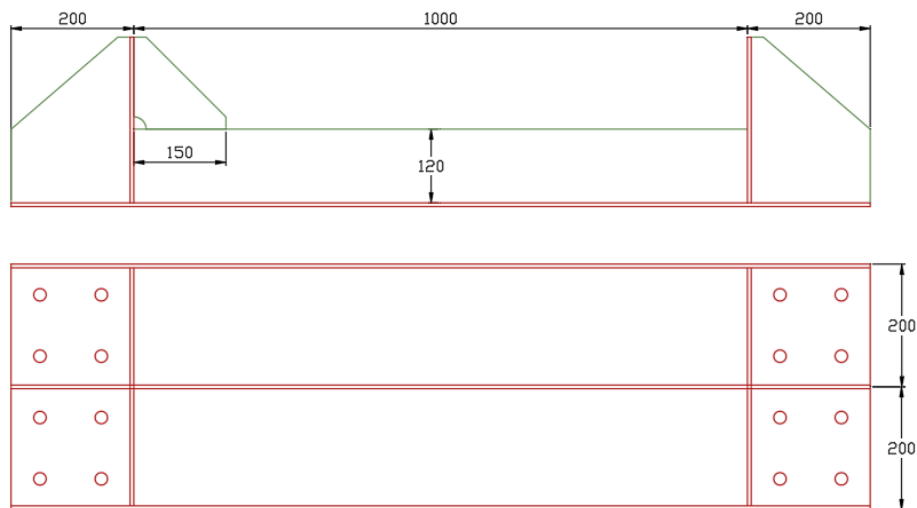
Main dimensions of the test piece. All parts are made from mild steel plate with thickness of 6 mm.
